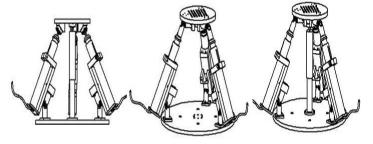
Parallel manipulator systems fabricated using the same modular components.
